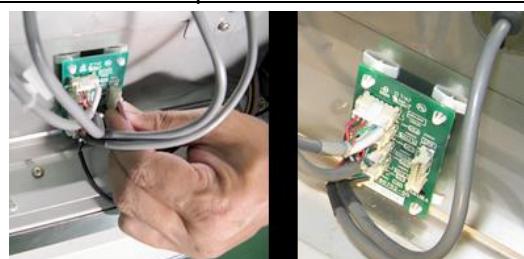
Remove the US relay cable and oven door sensor cable from the US board
